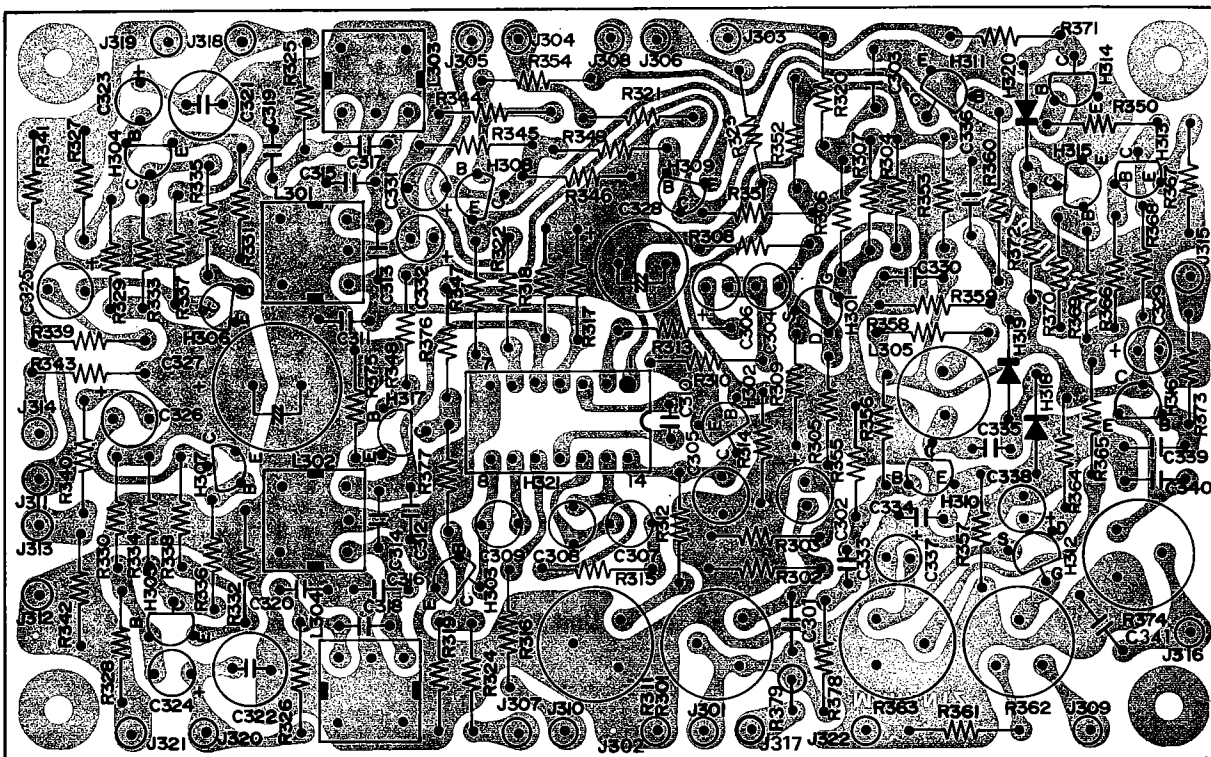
MPX Stereo Decoding Amplifier Assembly P300 Component Locations
